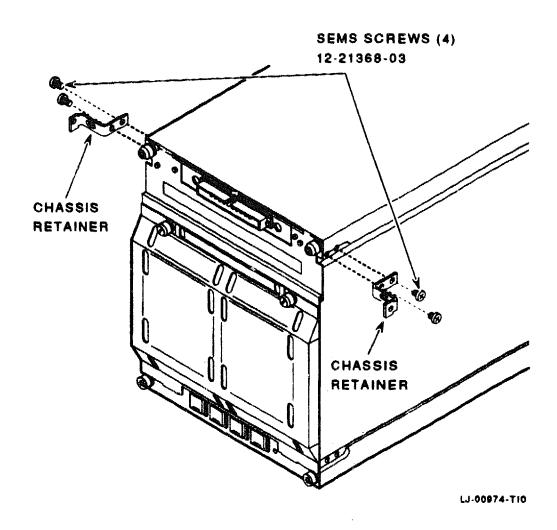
Attaching Chassis Retainers to Extrusion Tube
